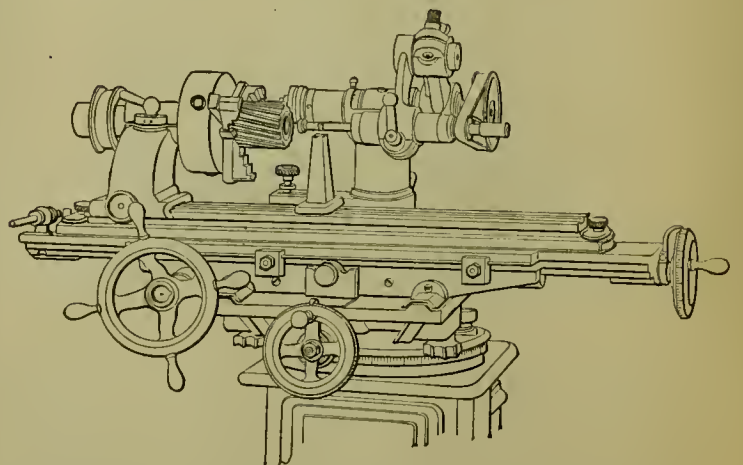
SPINDLE AND WORK ADJUSTED READY FOR INTERNAL GRINDING.
